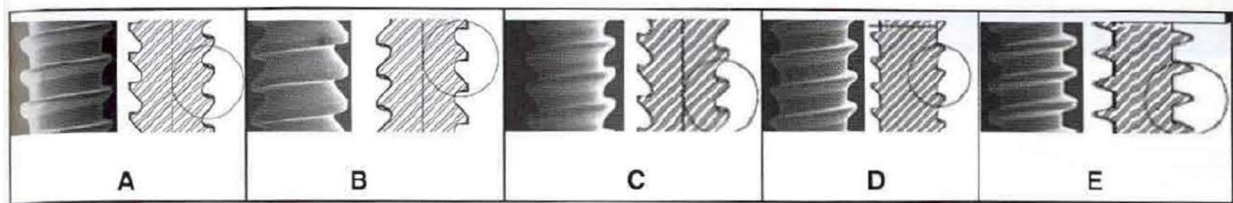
Schematic illustrations of miniscrew thread-designs: A, buttress reverse thread shape (control); B, buttress thread; C, 75° joint profile thread; D, rounded thread; E, trapezoidal thread.
